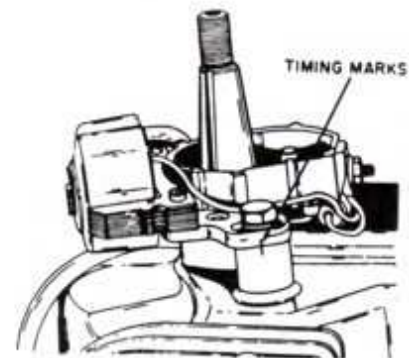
On Models VM70, VH70, HM70, HH70, VM80, HM80, VM100 and HM100 equipped with magneto ignition, adjust breaker point gap to 0.020 inch (0.508 mm) and align timing marks as shown.
